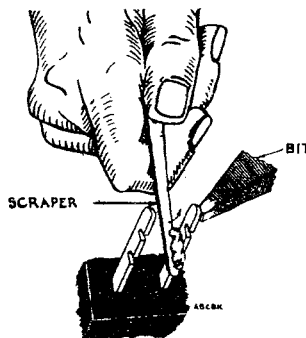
CLEANING A VERTICAL TAG WITH SOLDERING TOOL AND SCRAPER.
